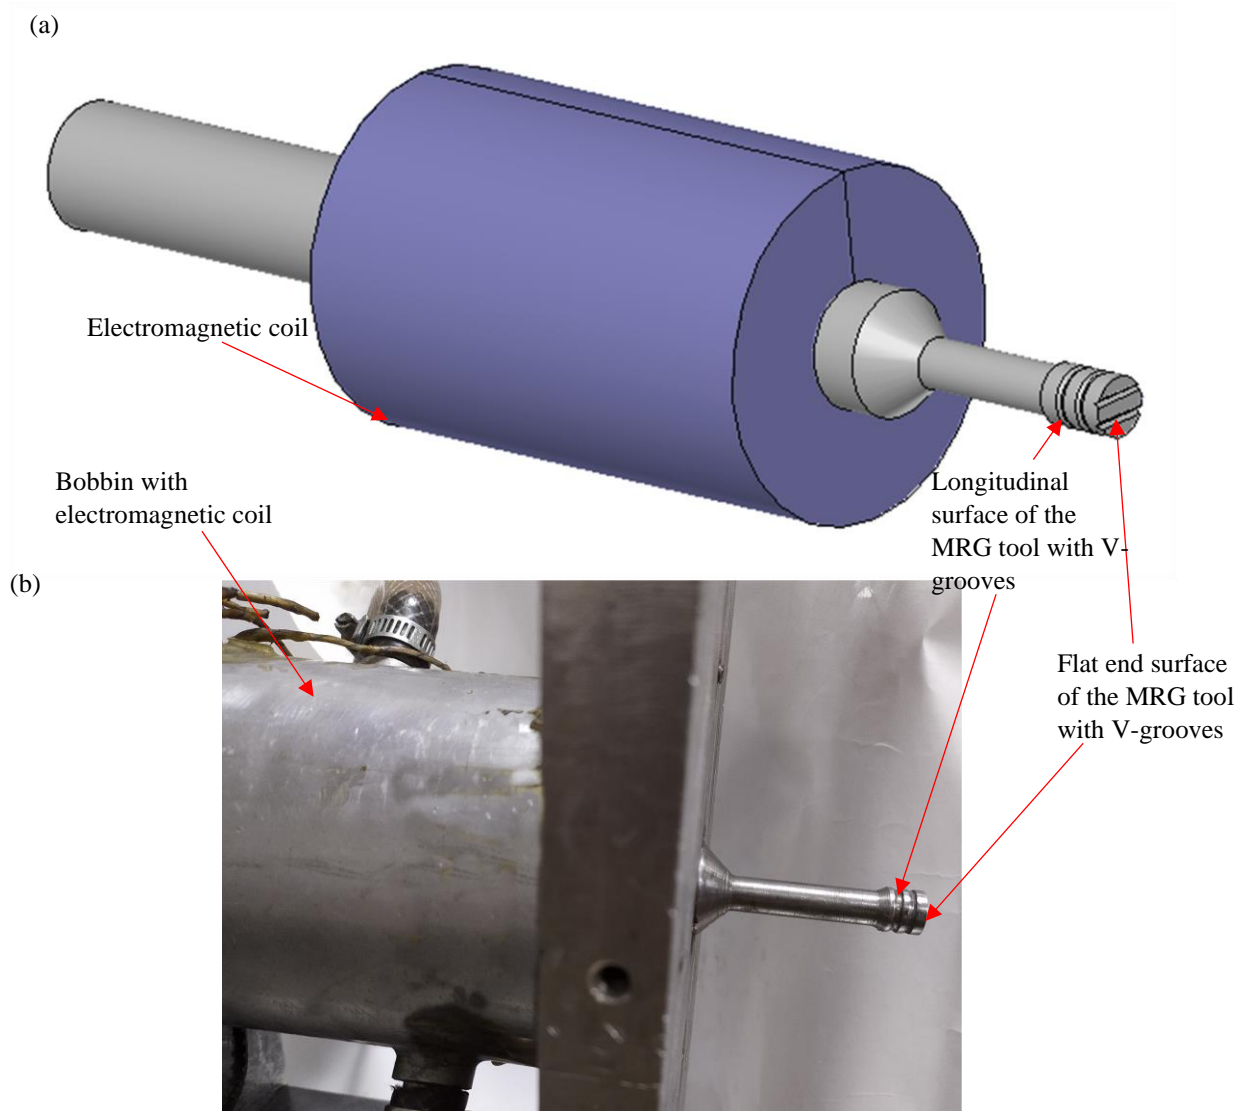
(a) 3D CAD model of the electromagnet coil with the final designed magnetorheological grinding (MRG) tool core and (b) its fabricated photograph.
